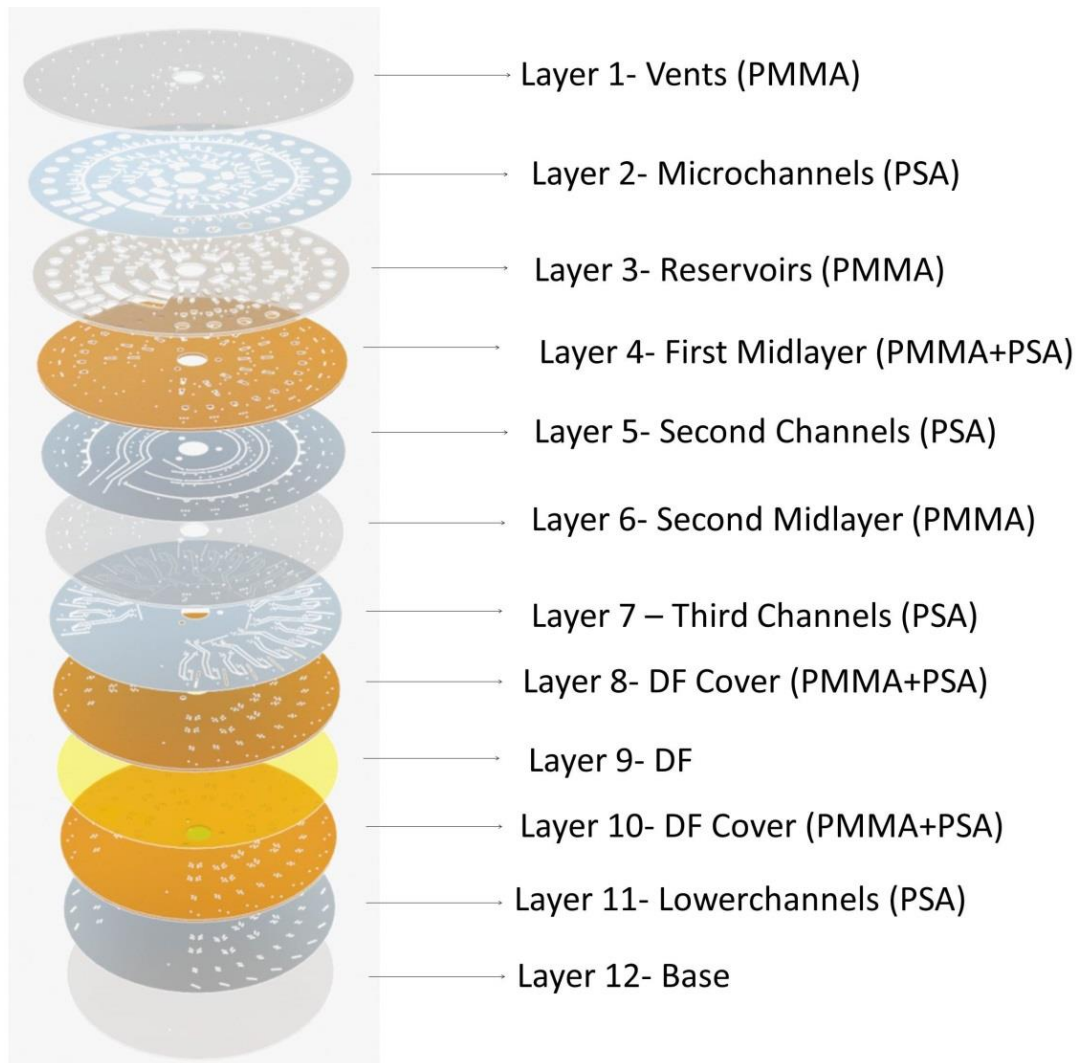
Detail of 6x4 disc assembly. A total of twelve layers included in the disc assembly which allowed a complex 3-dimensional multi-layer structure.
